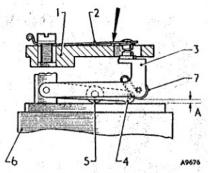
The contact gap setting on earlier-type rocker assemblies
